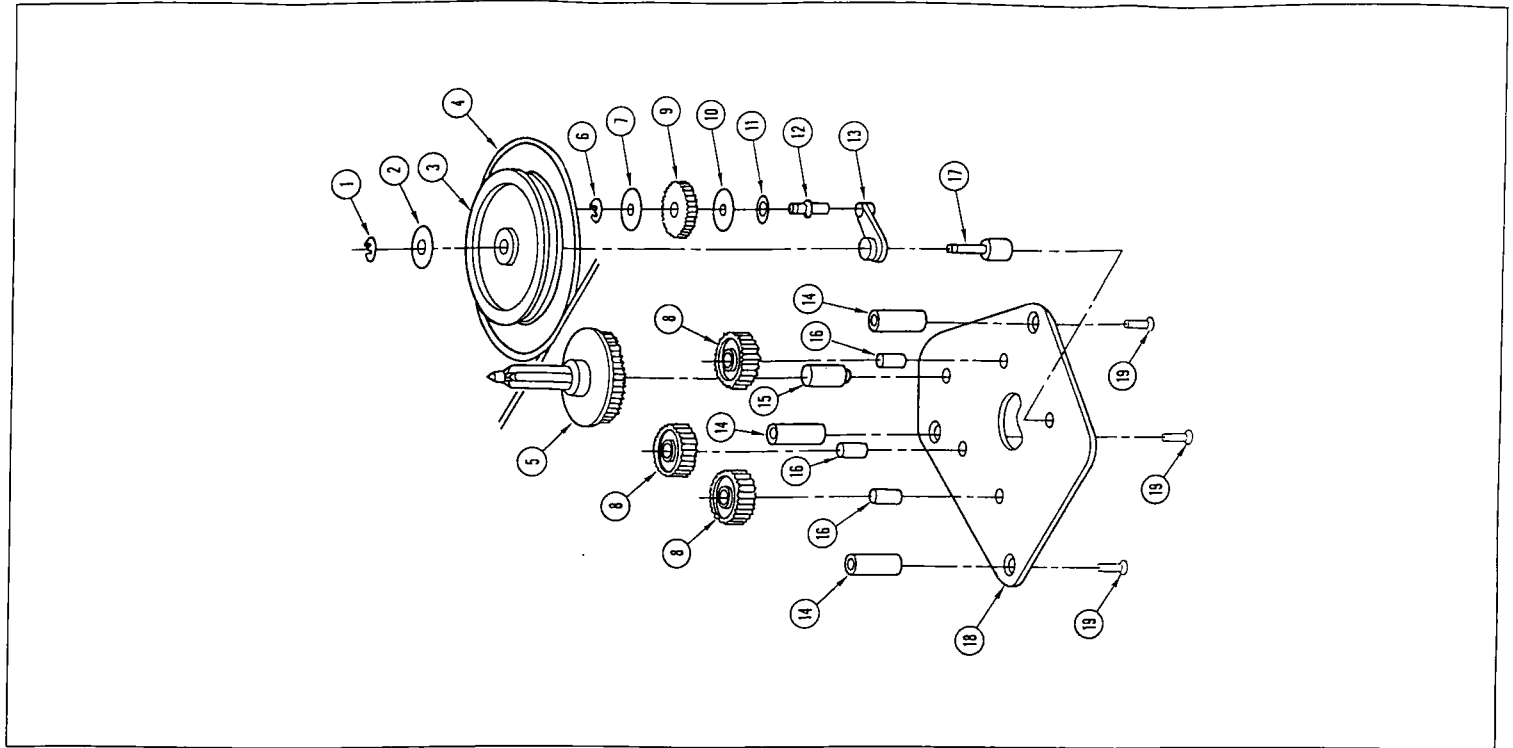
Exploded-View, Ribbon Drive Mechanism
